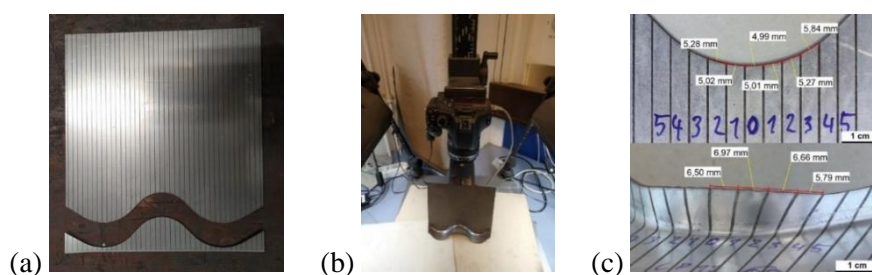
Marked blank with parallel lines (a). Camera setup (b) and optical measurement (c).
